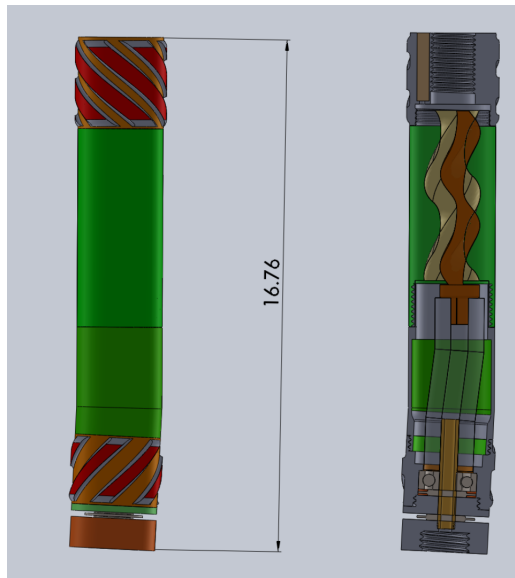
Modified version of the initial design. Dimensions in centimeters.
